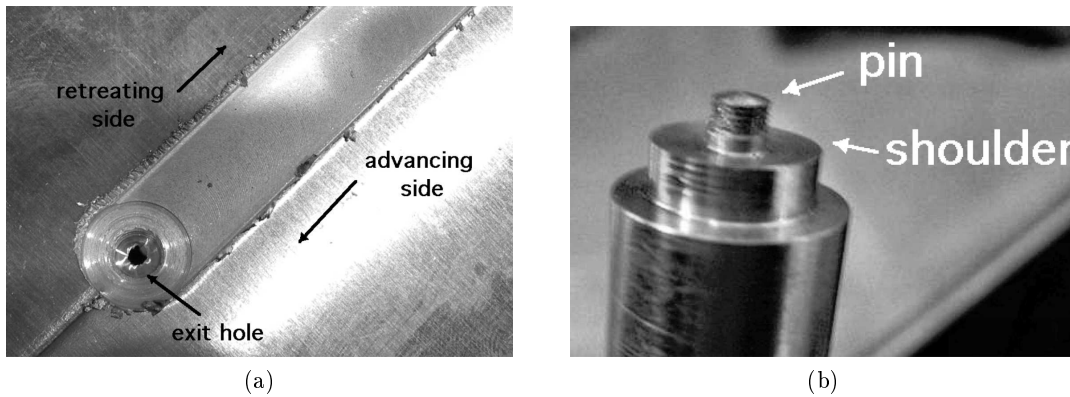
(a) An FSW weld between aluminium sheets (Nandan et al., 2008a). (b) An actual tool, with a threaded-pin (Nandan et al., 2008a).
